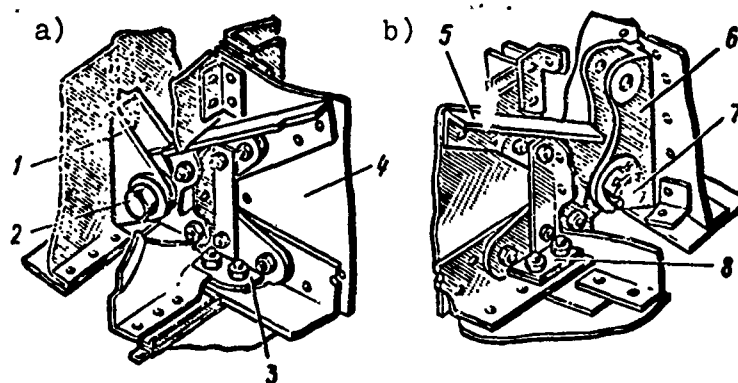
Attachment joints of the lower wing to the fuselage:
